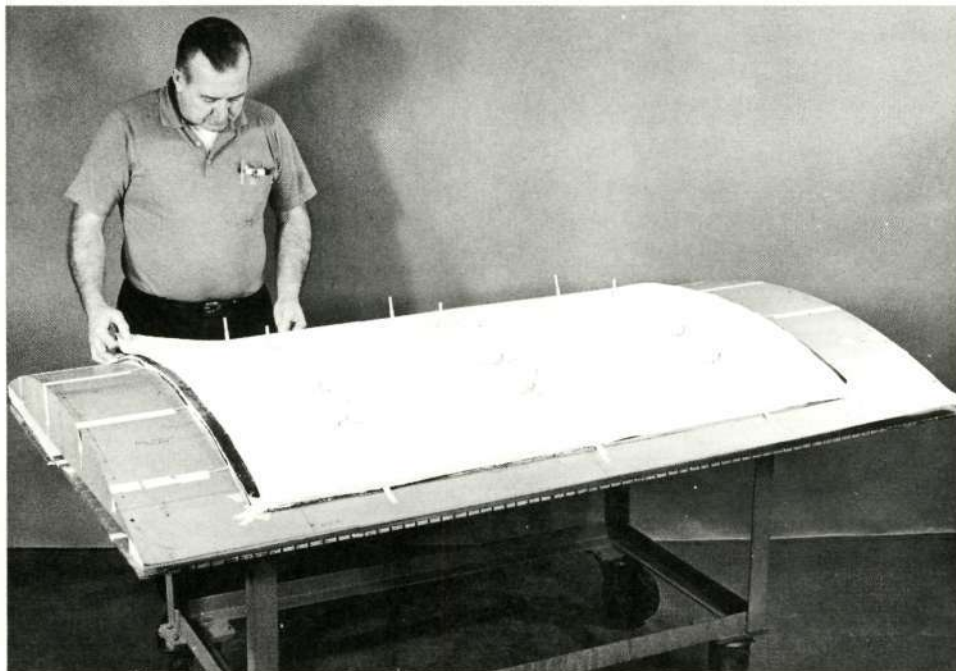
Flow test panel fabrication showing typical foam spacer layer with cardboard washers in place at pressure taps.
